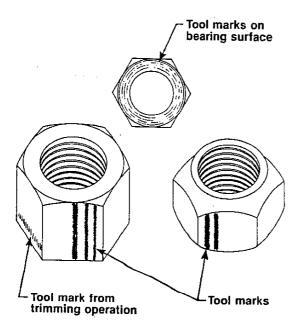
TYPICAL TOOL MARKS ON NUT SURFACE
